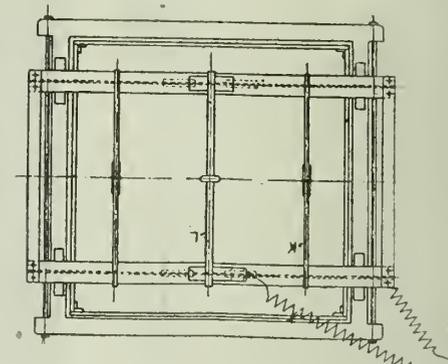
ELECTRO-GALVANIZING BATH (PLAN).
